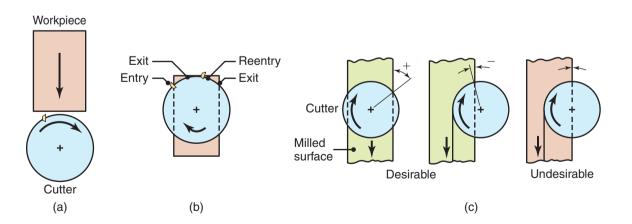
(a) Relative position of the cutter and insert as they first engage the workpiece in face milling. (b) Insert positions towards the end of cut. (c) Examples of exit angles of the insert, showing desirable (positive or negative angle) and undesirable (zero angle) positions. In all figures, the cutter spindle is perpendicular to the page and rotates clockwise.
